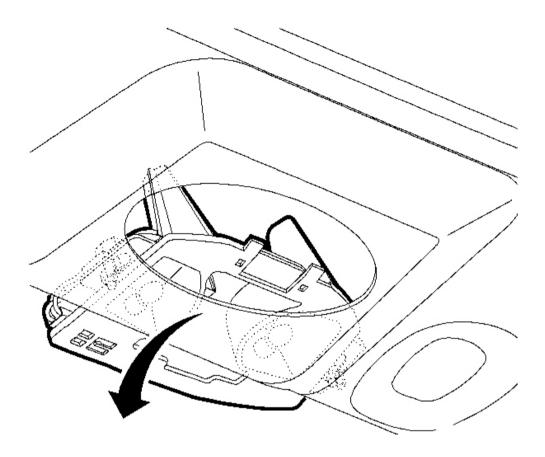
Pulling Headliner Down Slightly & Slide Forward Reading Lamp Courtesy of GENERAL MOTORS CORP.
